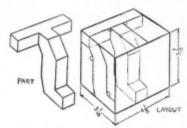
A three dimension cut, that required 9-hours by former methods—contour sawed in 27 minutes.
